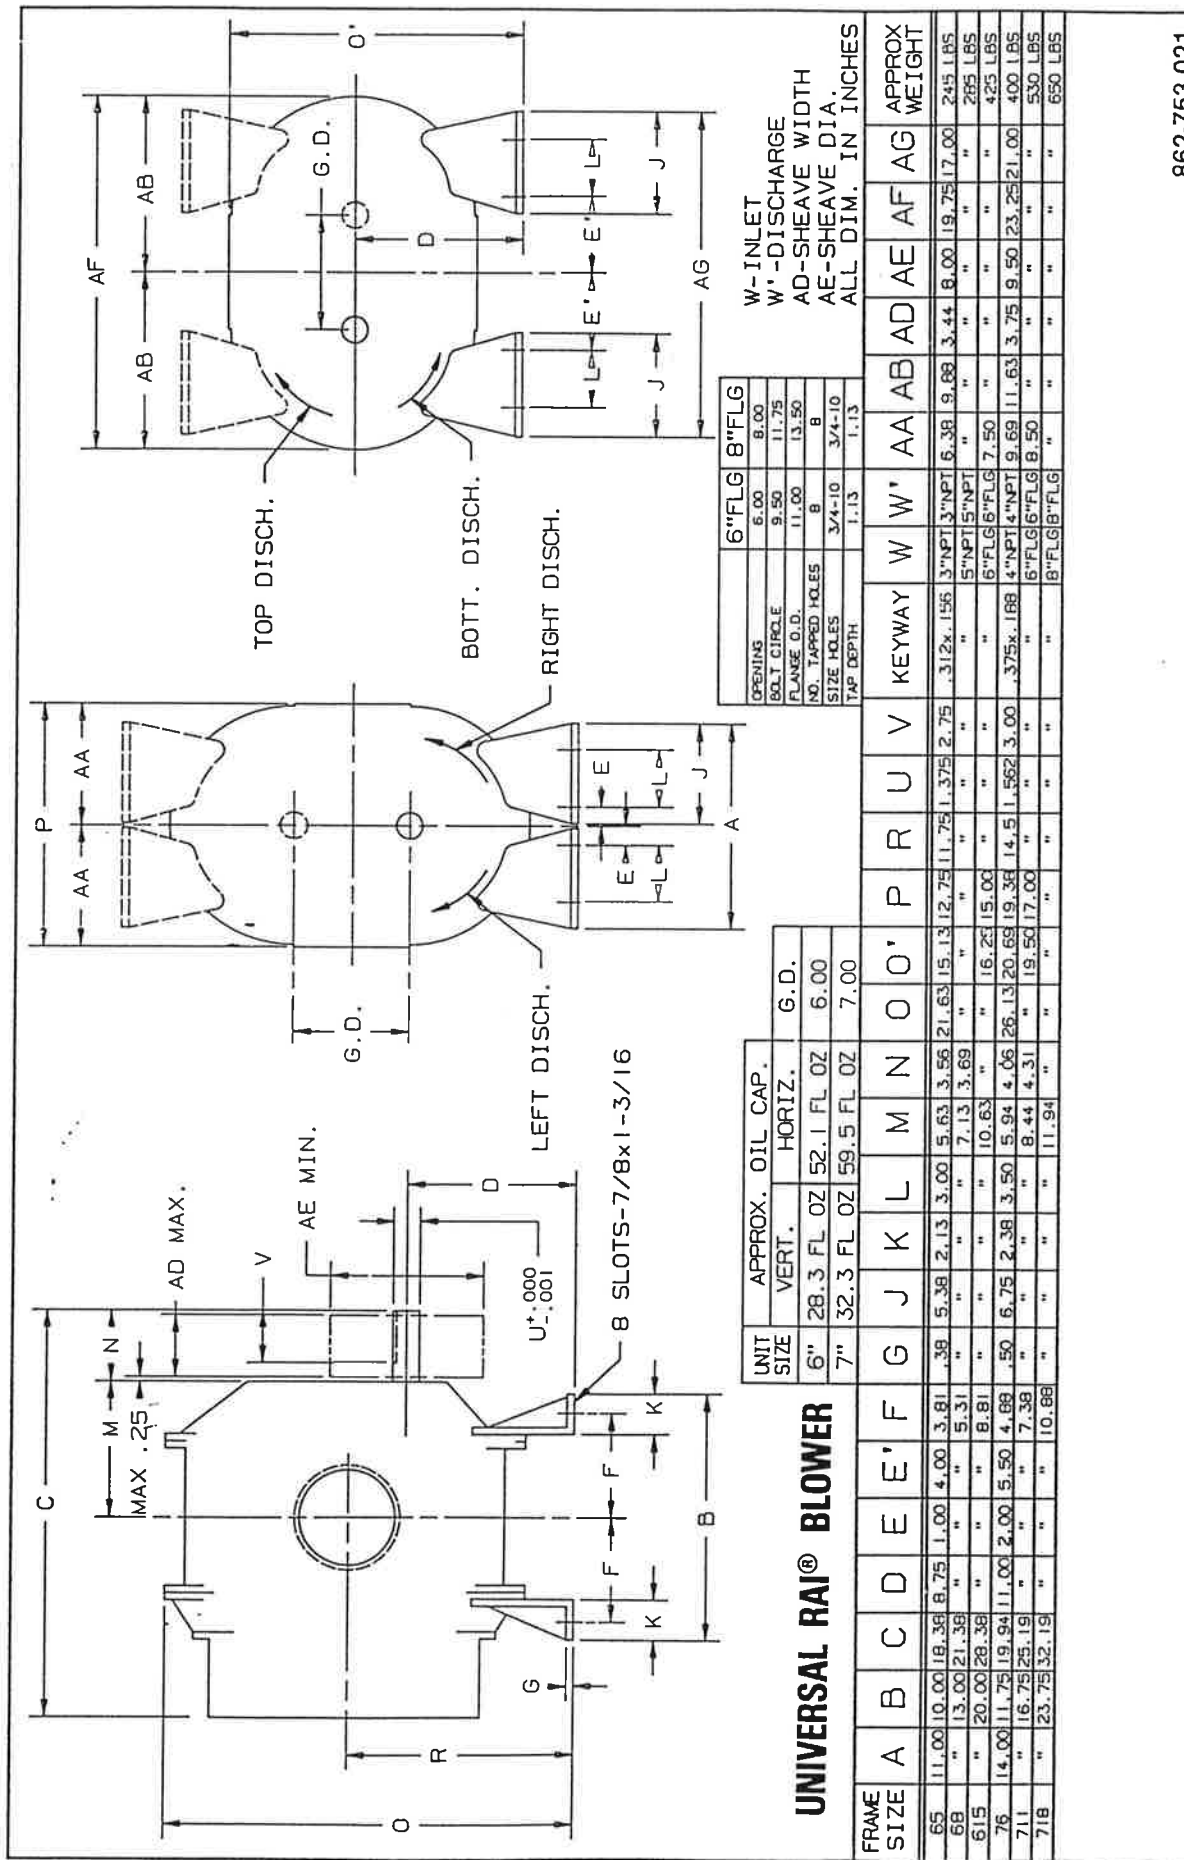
Assembly of UNIVERSAL RAI® Blowers, 6" and 7" Gear Diameter
